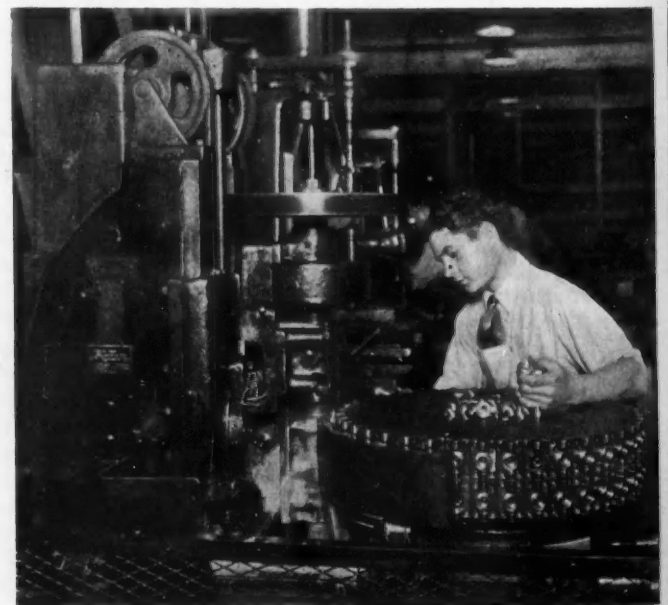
MILLING KEY-SLOTS IN LOWER FITTINGS
